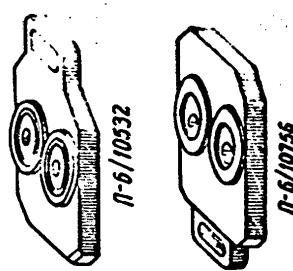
FIXTURES FOR CRANKSHAFT REPAIR
